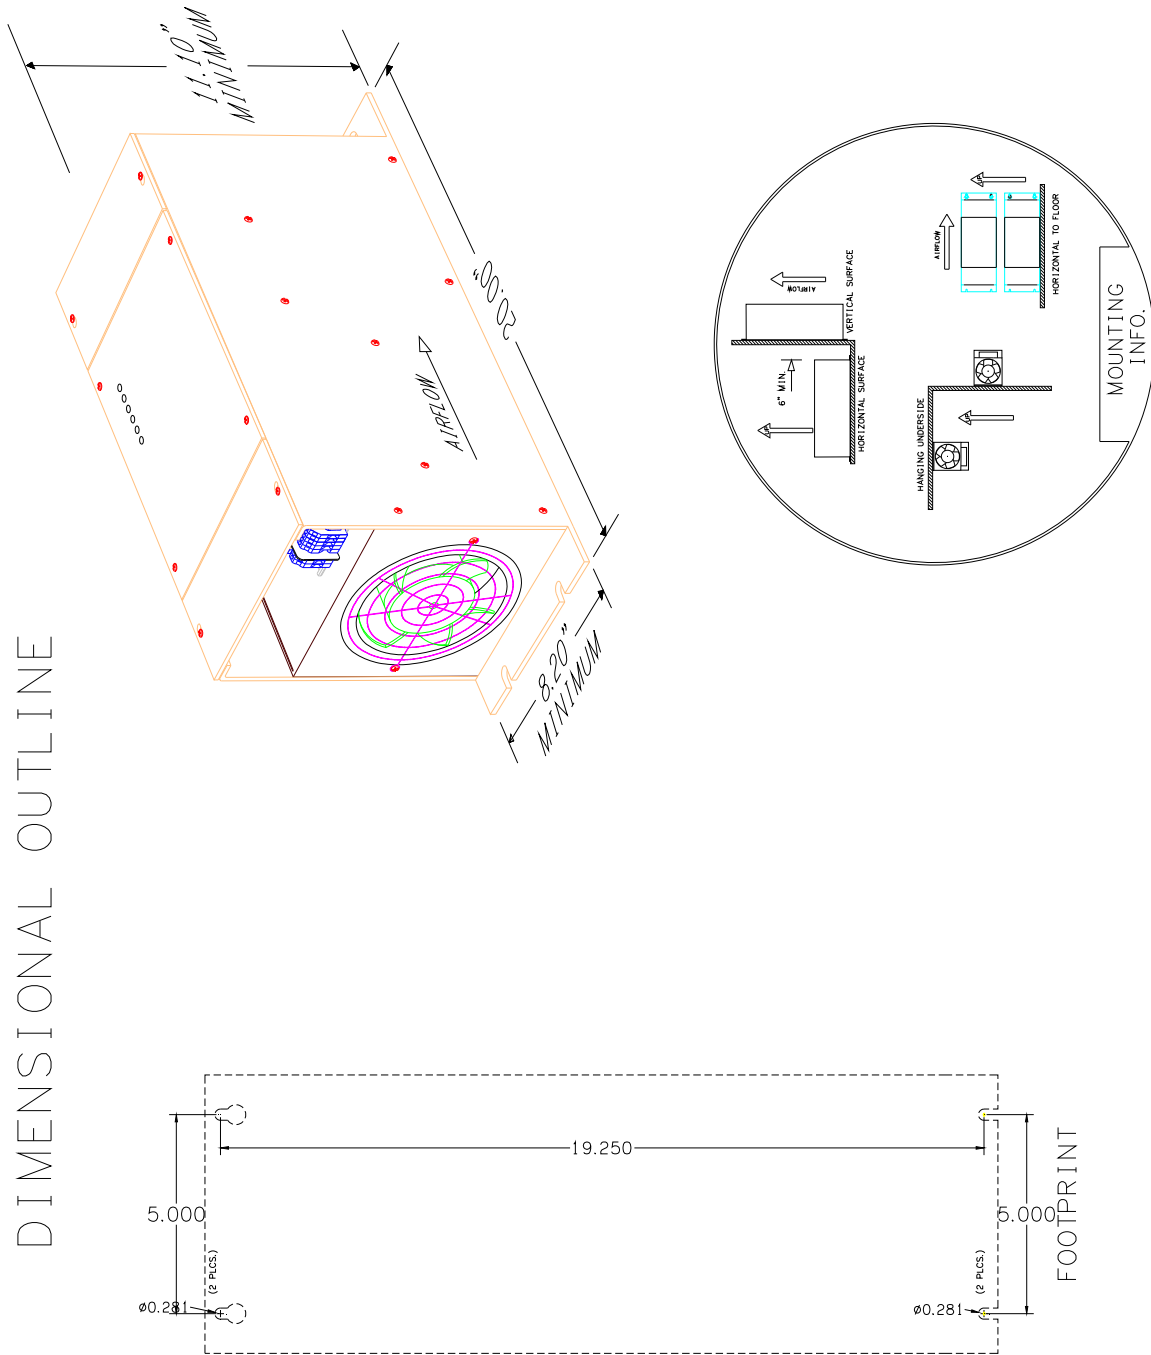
M3528 20 Amp Charger K8 Chassis Mounting and Dimensional Outline
